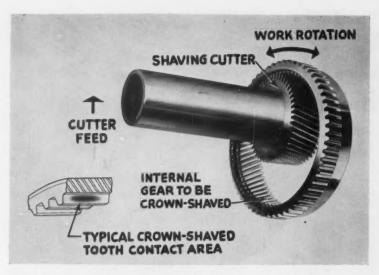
Illustration showing how Red Ring plunge-cut rotary shaving process produces crown-shaved tooth forms on spur and helical internal gears
